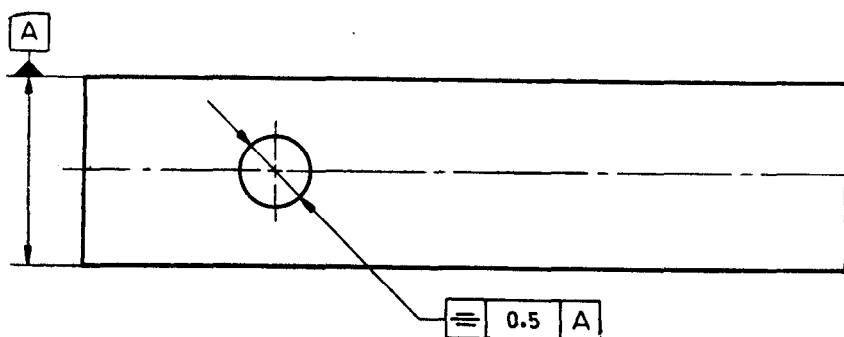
DEVELOPED VIEW OF BUSH WITH HOLE
